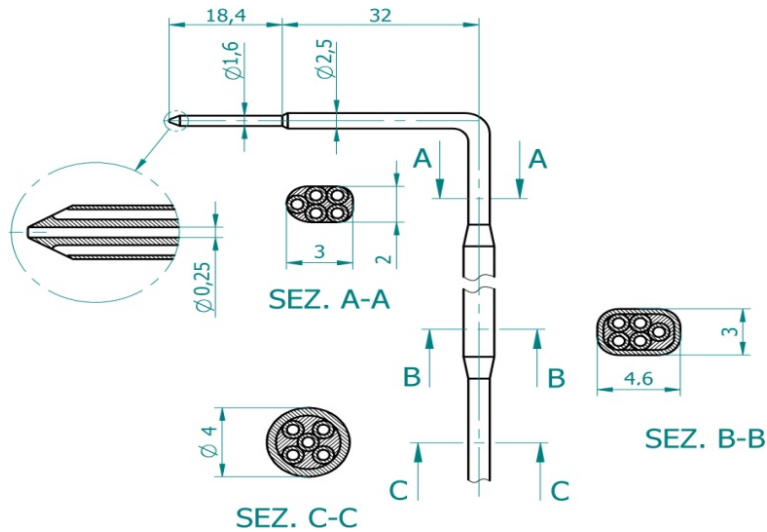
Technical drawing of the used 5-hole pressure probe
